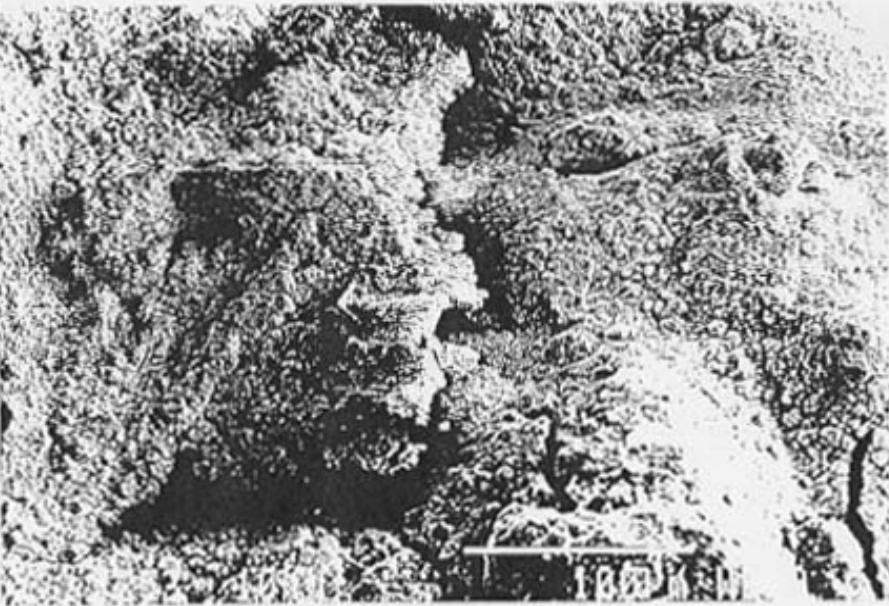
Inner starboard A3 hinge lug secondary fatigue crack striations
